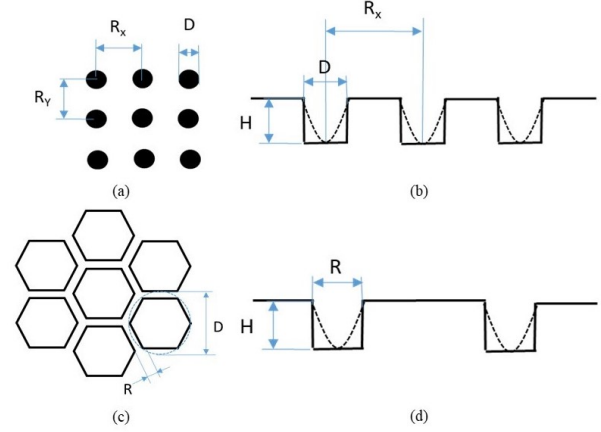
Schema of designed surface structures with basic dimension: a) dot structure – view from top; b) dot structure – cross-section profile; c) honeycomb structure – view from top; d) honeycomb structure – cross-section profile.
